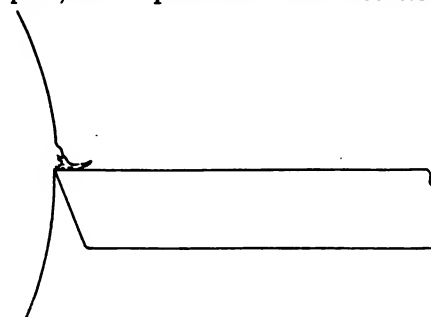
FOR CUTTING BRASS THE TOP SURFACE OF THE TOOL IS LEVEL
